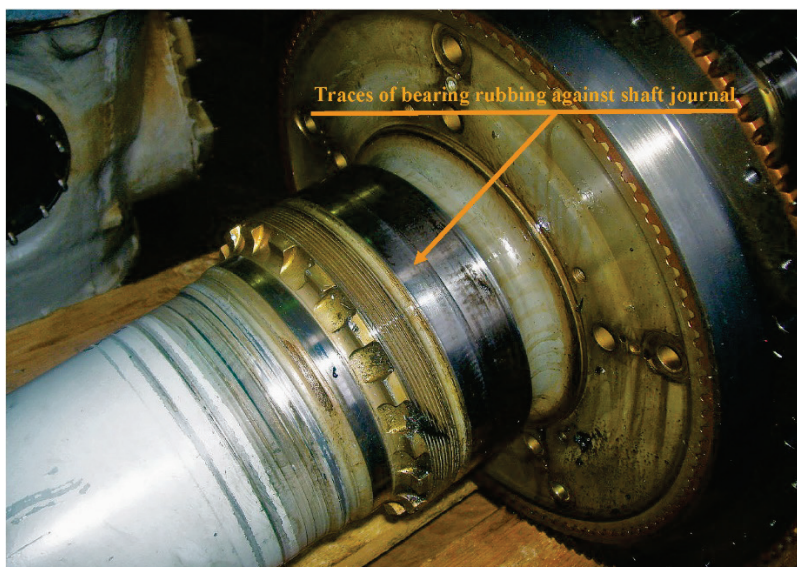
Bearing seat of the negative standard WR-24 main transmission upper bearing
